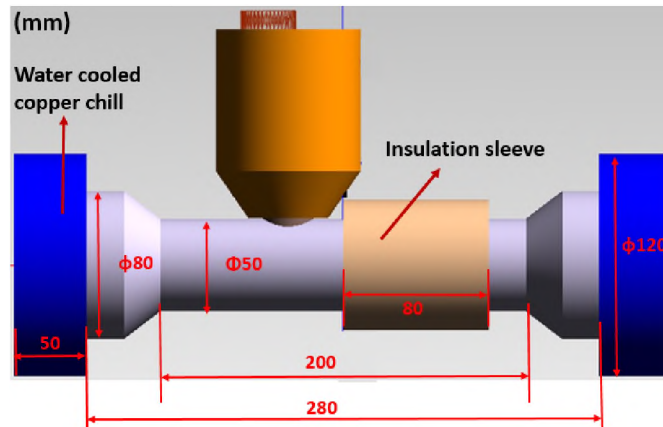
Side view of the test casting design showing the cylindrical test casting, insulation sleeve used to delay solidification in the test area, and water cooled copper chills on each side of the casting used to induce solidification and allow mechanical locking of the test casting.
